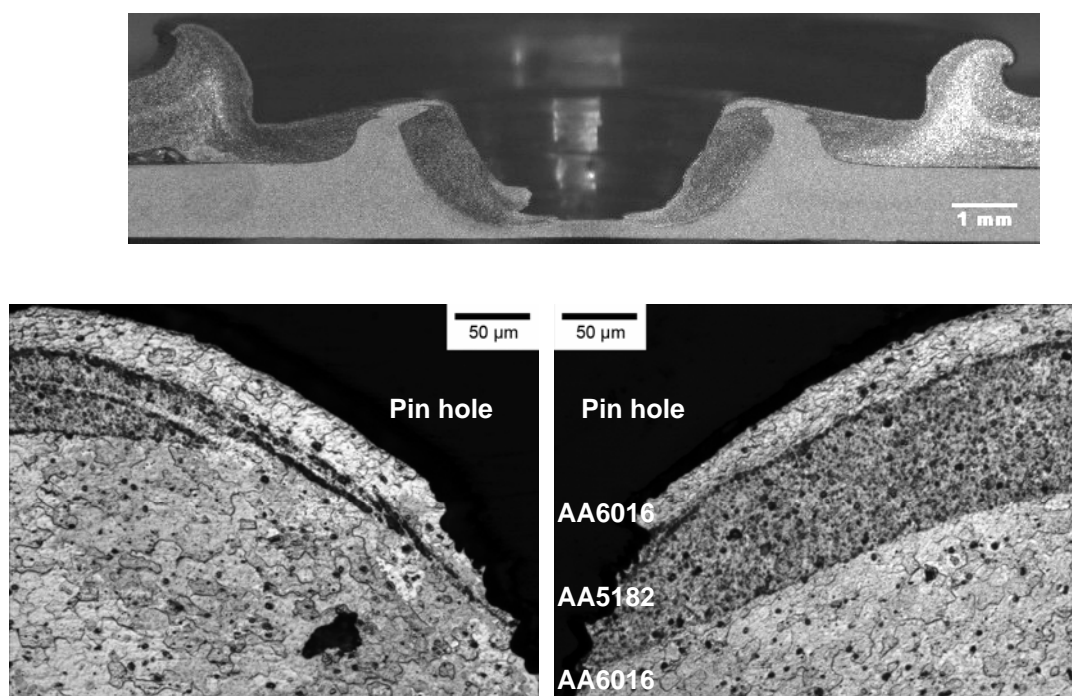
Bottom sheet material flowed back into the stir zone.
